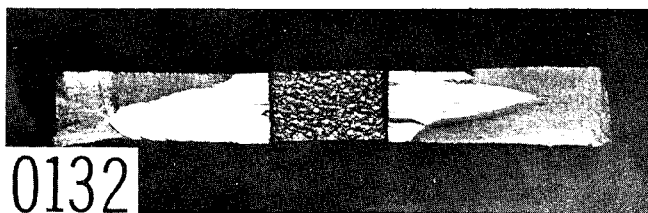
RW fatigue crack and monotonic fracture in a center-cracked crack toughness of specimen Ti-4Al-3Mo-1V. 6X.
